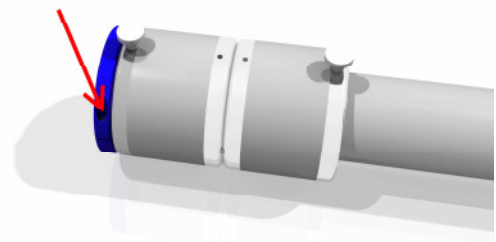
RMDG40 with rear ball bearing and front ball bearing cage
